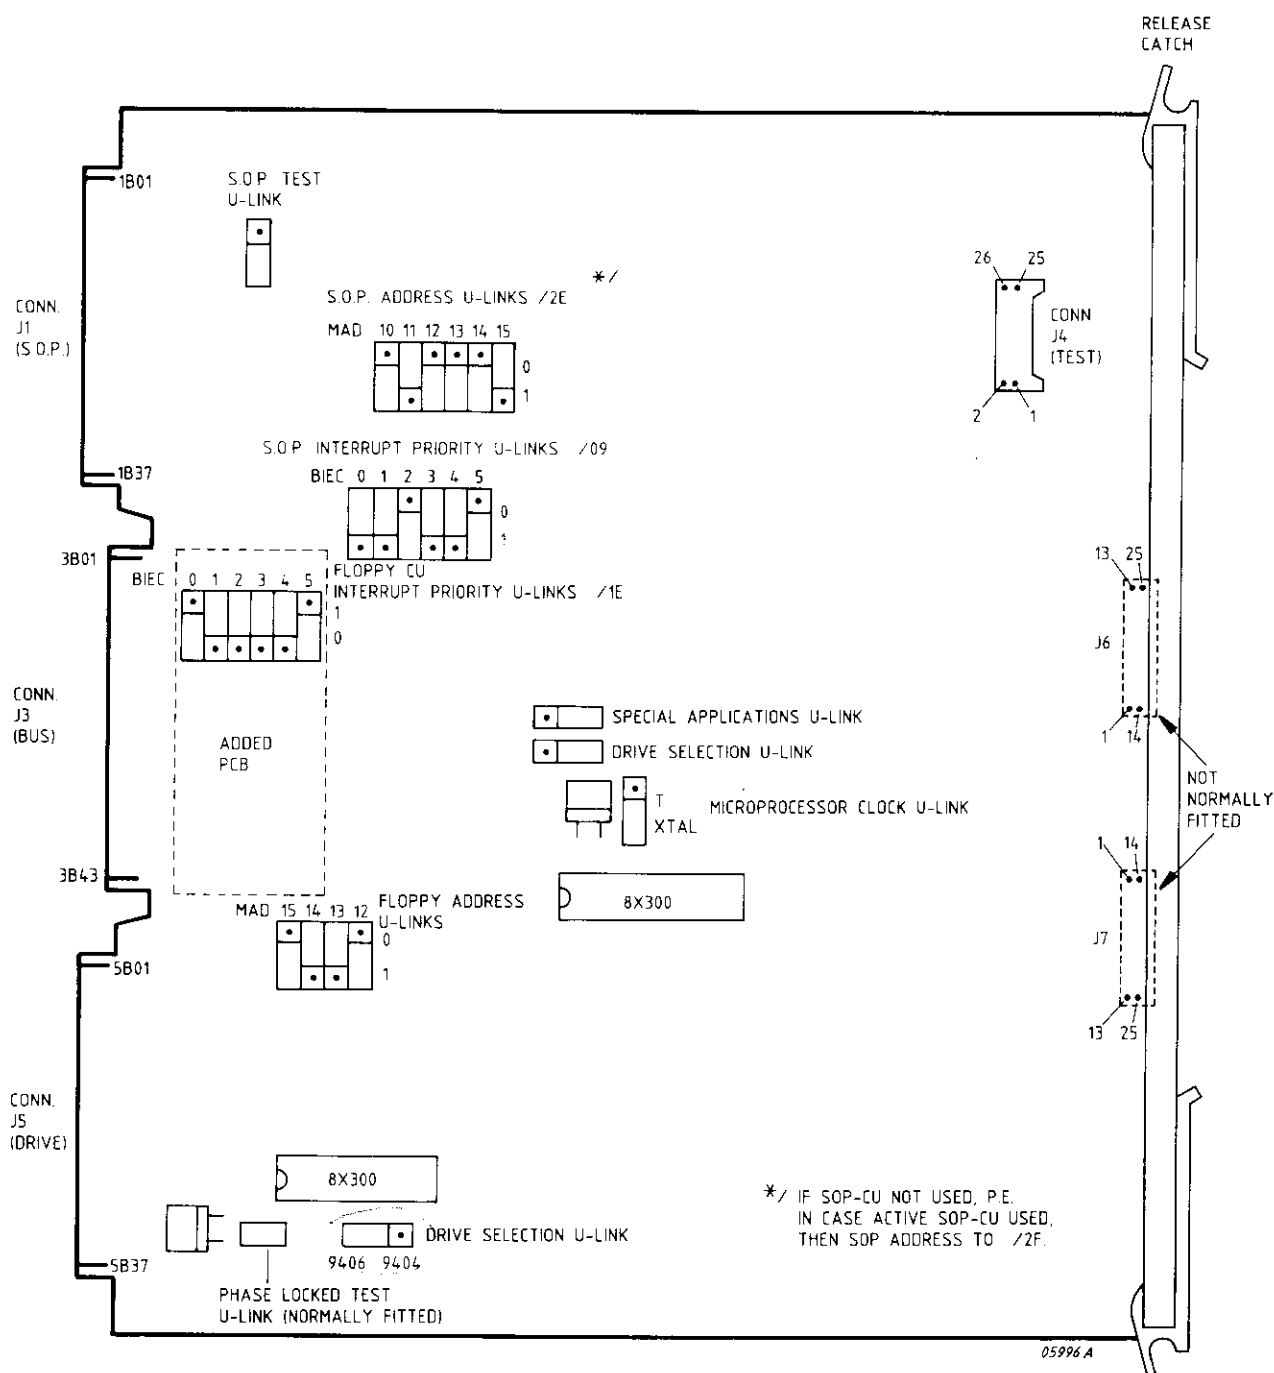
LAYOUT OF F1MB CARD WITH ADDED PCB
